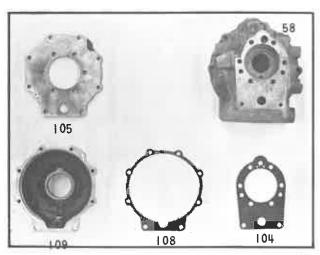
2.57 & 2.91 Reduction Parts Used with Former Circulation System
